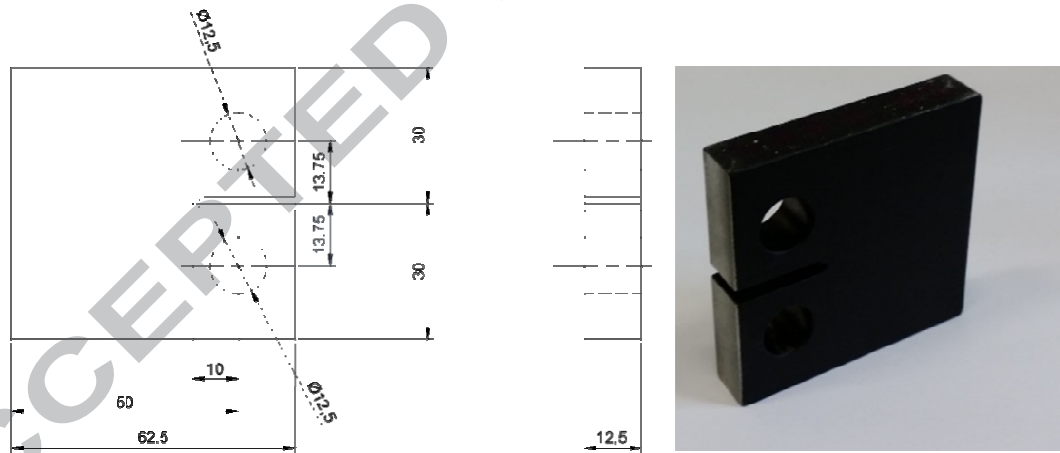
Specimen dimension in mm according to ASTM E 647-00.
